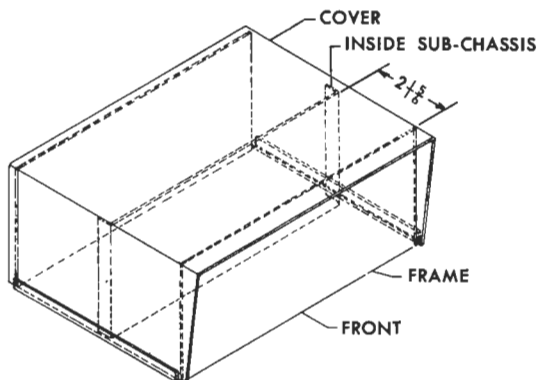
ASSEMBLY DRAWING of the cabinet top and bottom, showing the position of the center chassis in the cabinet. The cabinet and chassis are fastened together with self-tapping screws.
